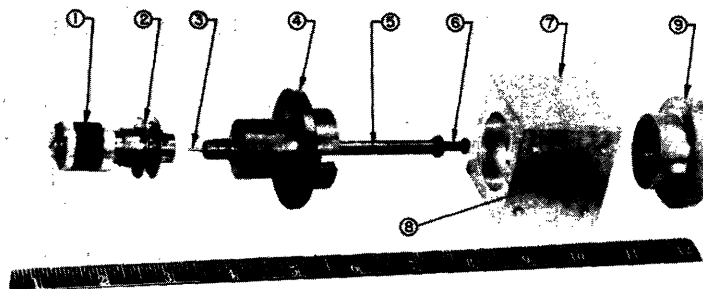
Components of rotating probe assembly: (1) crystal holder and slip-ring assembly; (2) pulley; (3) center conductor of coaxial line; (4) end cap; (5) probe; (6) tuning screw; (7) model anode; (8) end cap.
